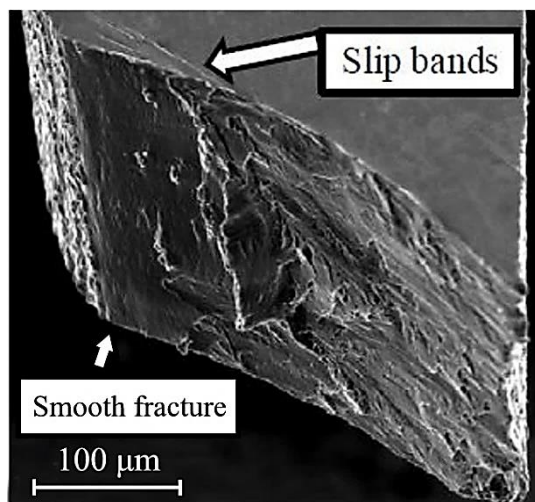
SEM image of the fracture surface of a Ti-5111 specimen taken from the retreating interface in the middle of the weld produced using friction stir welding (FSW) (Nimer 2011).
